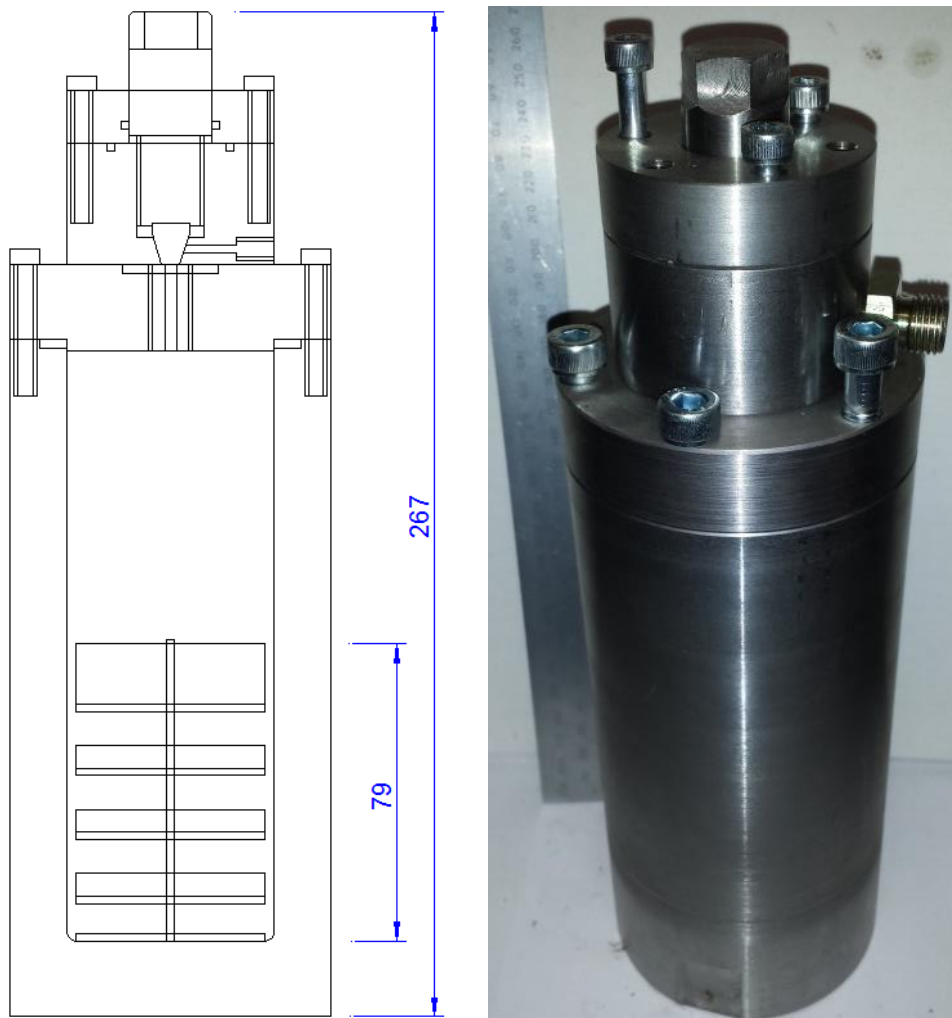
Diagram and Photograph of Complete Pressure Pot (All Dimensions are in mm)
